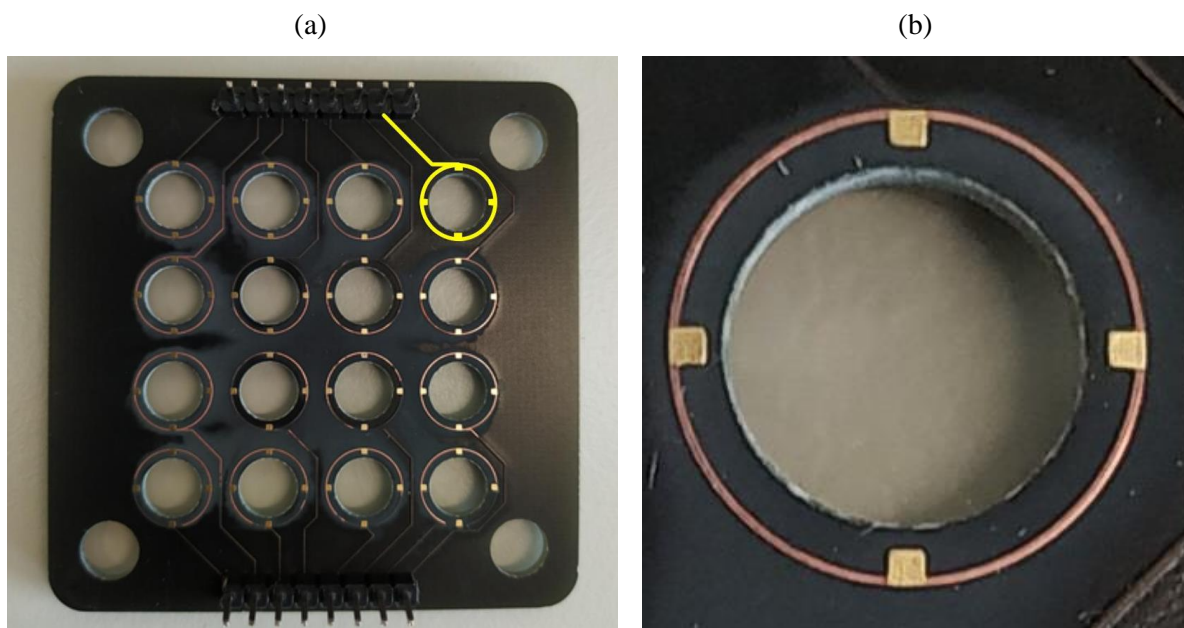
(a) Picture of the new PCB design. The yellow highlighted area shows the positioning of the 4 gold rectangular contacts and how they are connected to the external electrical contacts. This side of the PCB is in contact with the ePTFE with the catalysts while the opposite side is in contact with the electrolyte. There are no gold contacts on the opposite side of the PCB, only the black non-conductive substrate. Pin headers have been welded to the external contacts to create a reliable connection with the potentiostat. (b) Zoomed in picture of one gold contact.
